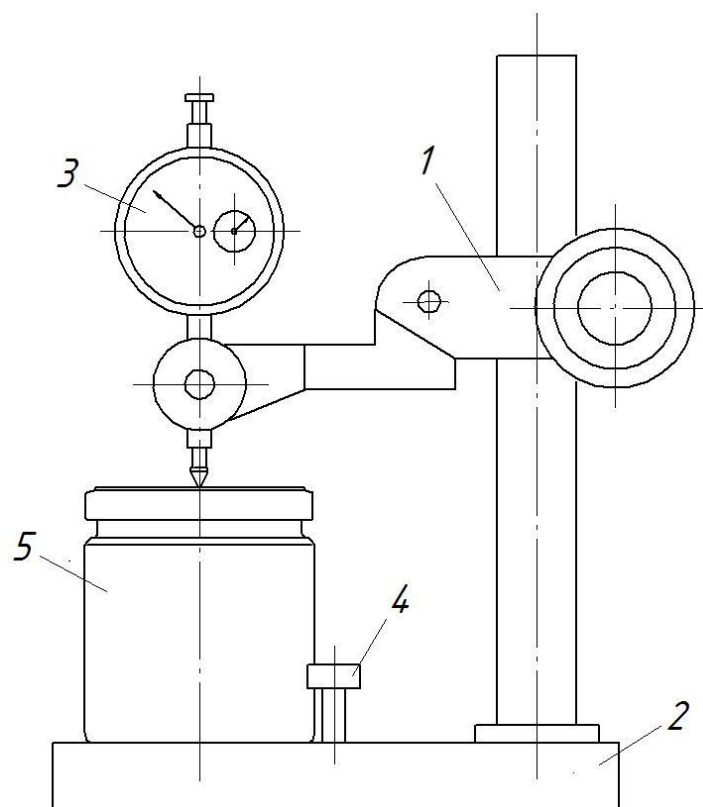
Indicator device. 1 – tripod; 2 - control plate; 3 - dial gauge; 4 - locking stops; 5 – tested sample.
